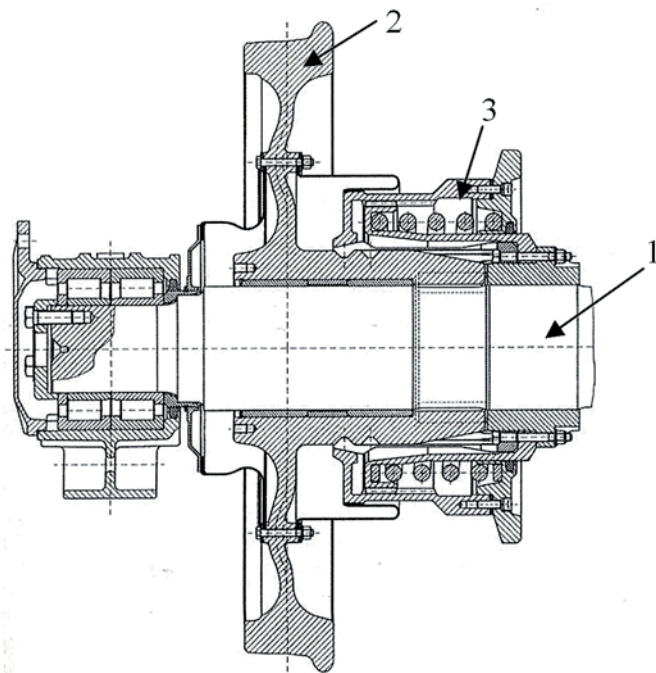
Cross section of a wheel set with automatic change of wheel track SUW2000 [13]; 1 – wheel set axle, 2 – wheels rolling on the set axle, 3 – lockup mechanism
